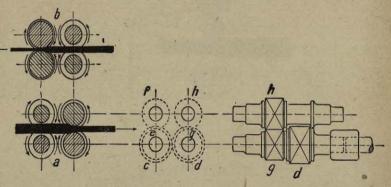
Brown's Reciprocating Mill. Arrangement of Pinions is shown on right side.
